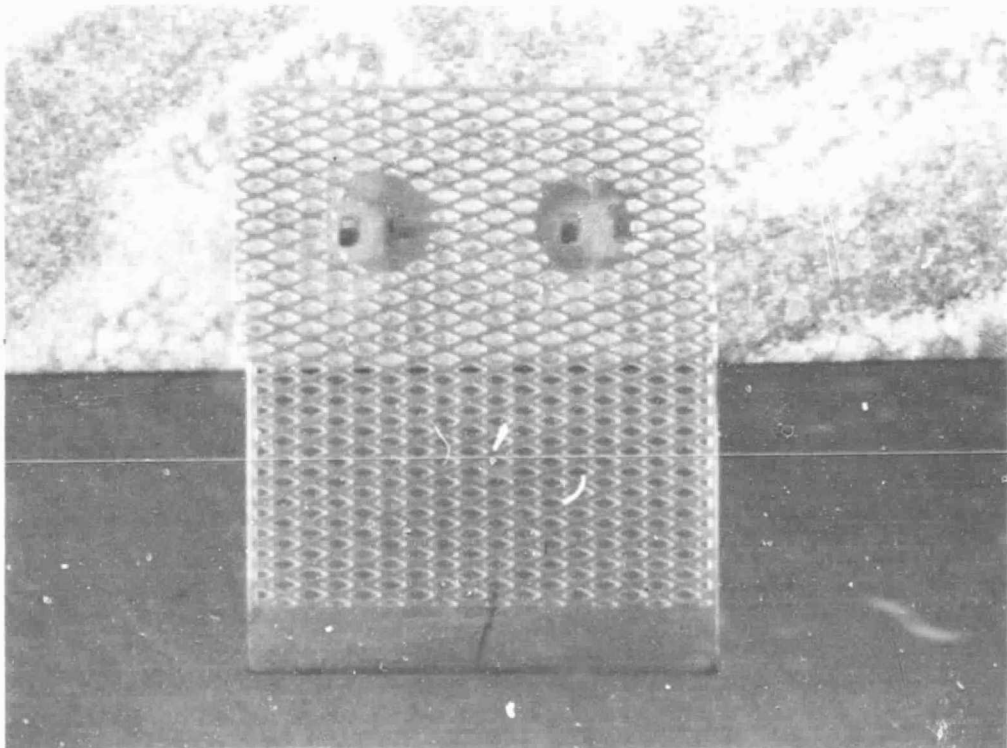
PARALLEL GAP WELD PULL TAB
